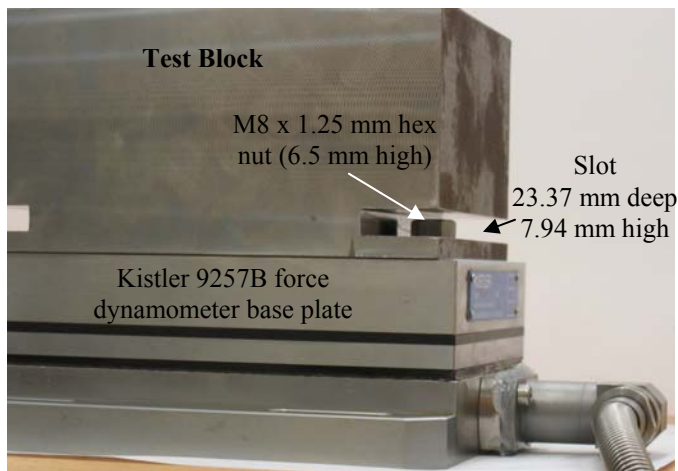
Test block clamped down to the Kistler dynamometer plate using M8 x 1.25 mm hex nut and socket head cap screw
